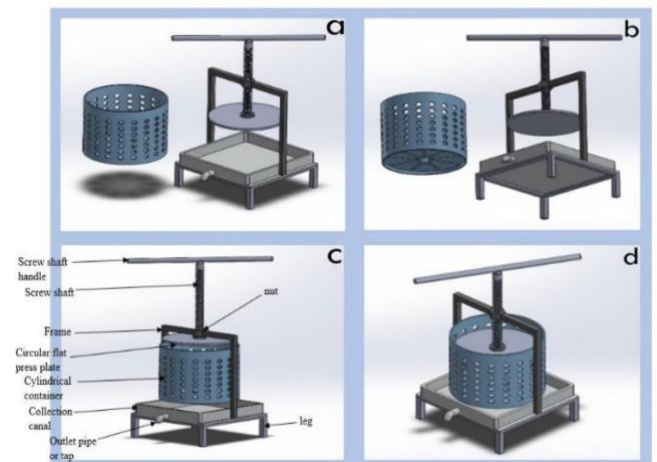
Shows the *SolidWorks* Design of the Gari Press (a-b) 3D Views of the Different Components of the Press (c) Exploded View of the Gari Press (d) Fully Assembled Gari Press
